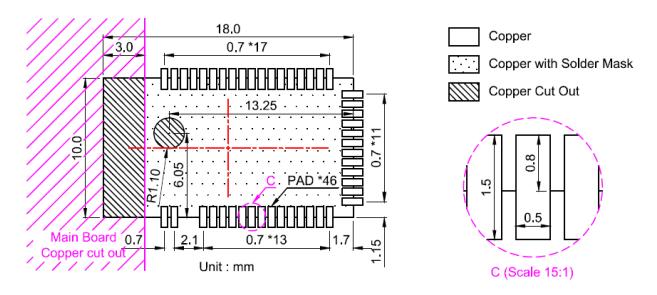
PCB Layout Guide (ISBLE1810-P51xxxxxA)
